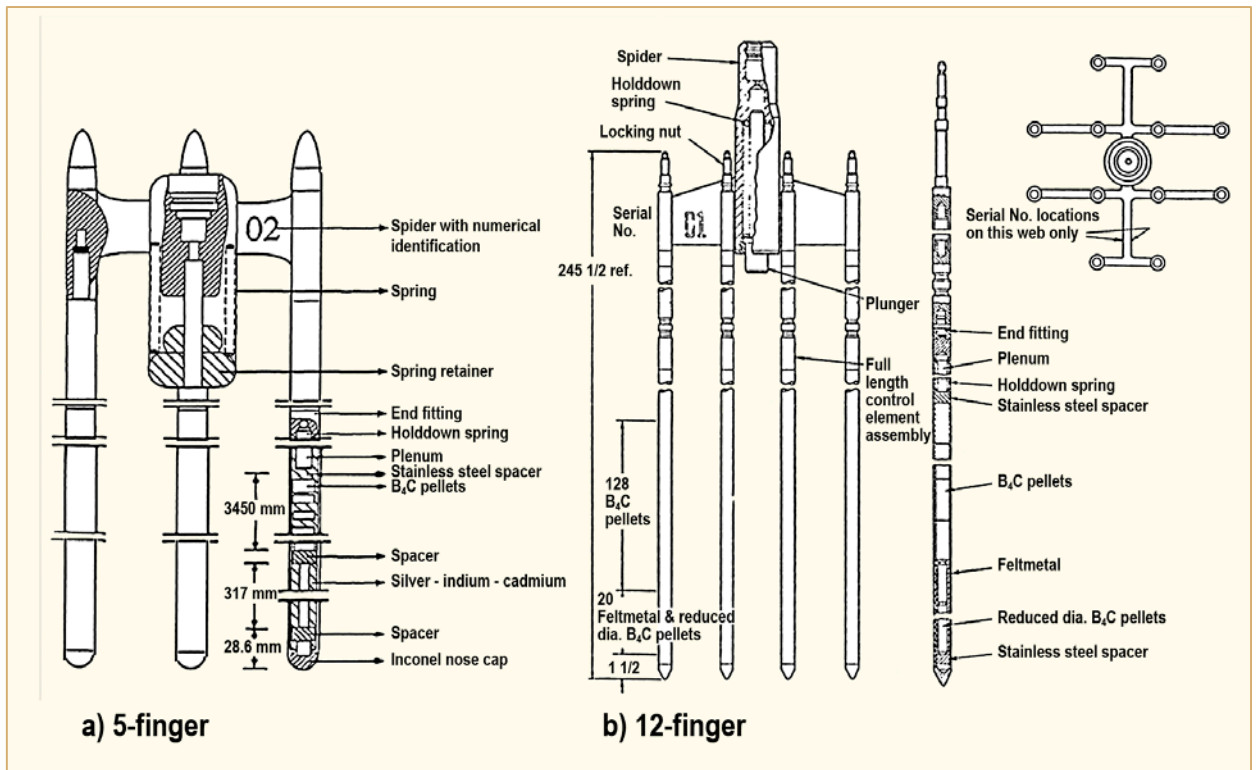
Control Assemblies (CAs) for combustion engineering standard a) and system 80 b) 16x16 fuel NSSS.
